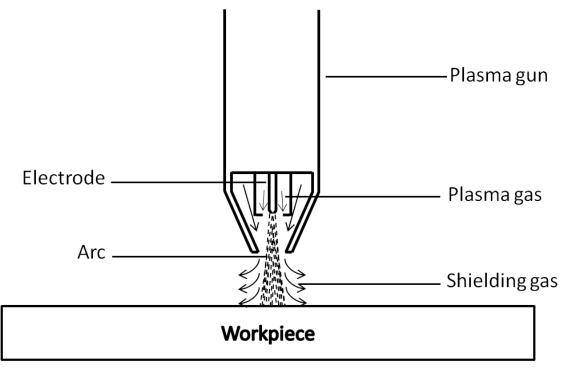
Schematic illustration of a plasma welding torch.
